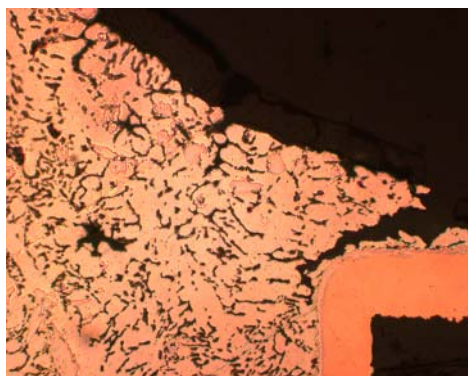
25% SnAgCu/ 75% SnPb TH joint, fillet lifting
